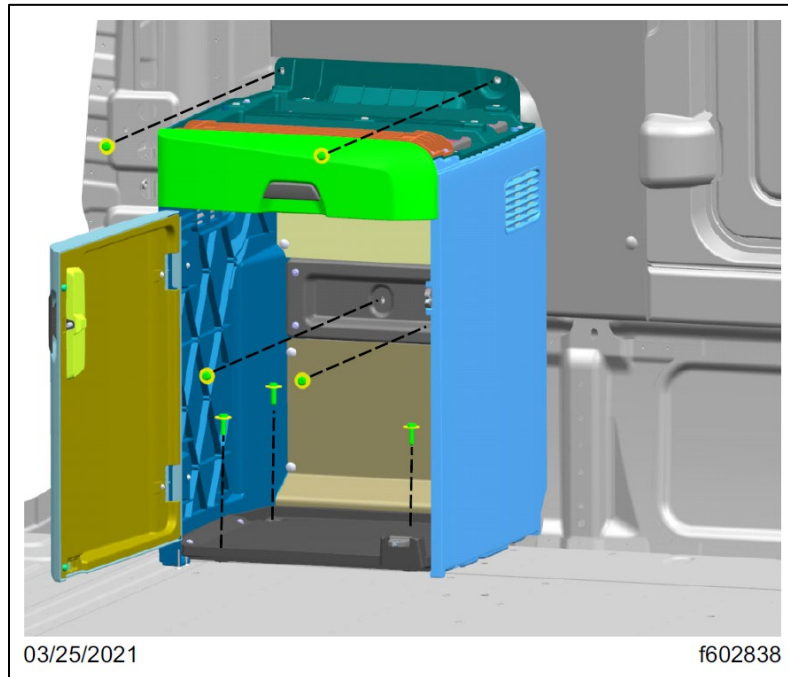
, Fasteners That Attach the Refrigerator Cabinet to the Cab
